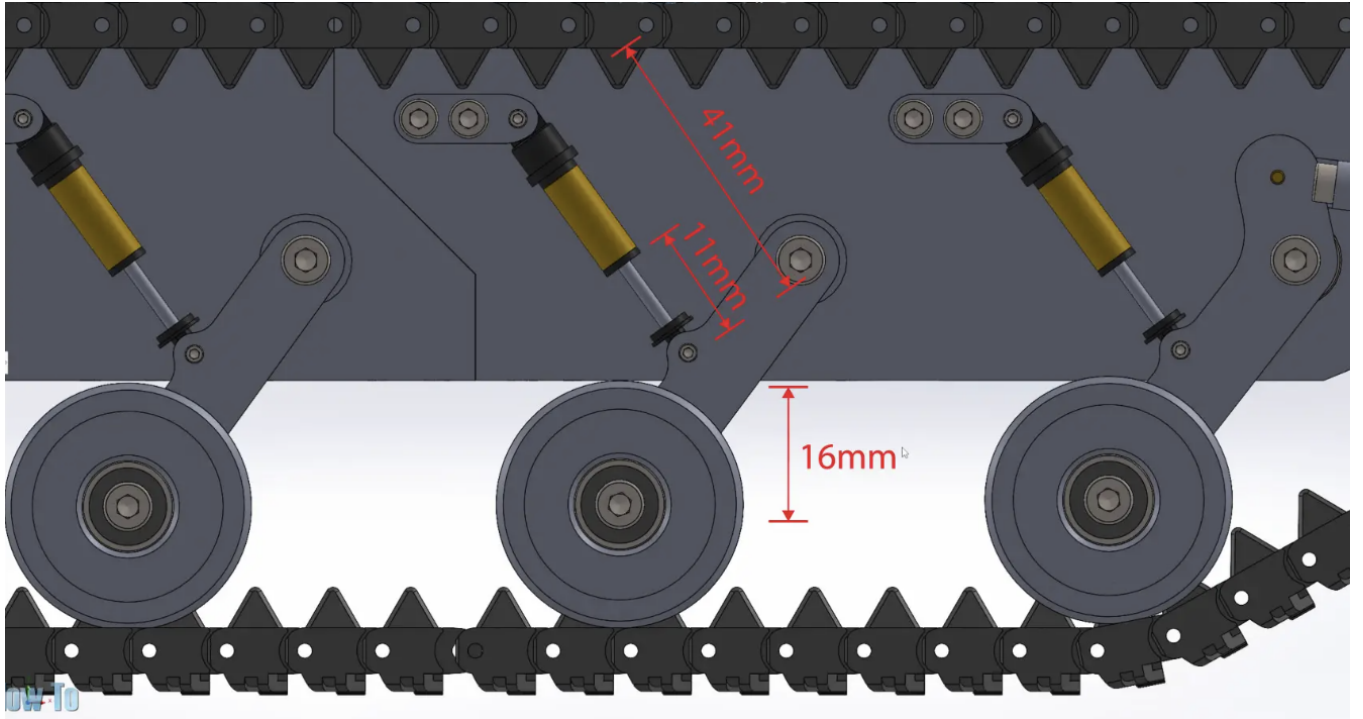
Engineering Model 1: Mass-Spring-Damper System
